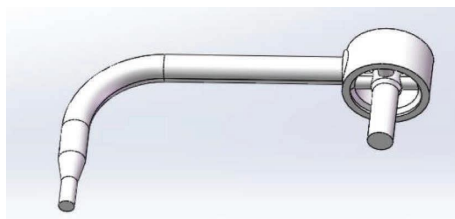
The fluid domain model of the piston cooling nozzle.
